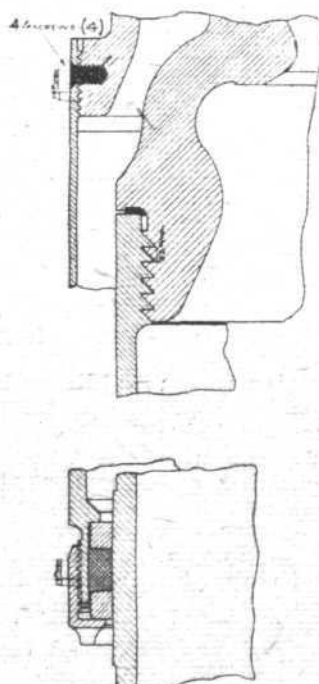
Details of cylinder head and water jacket screwed joints.
